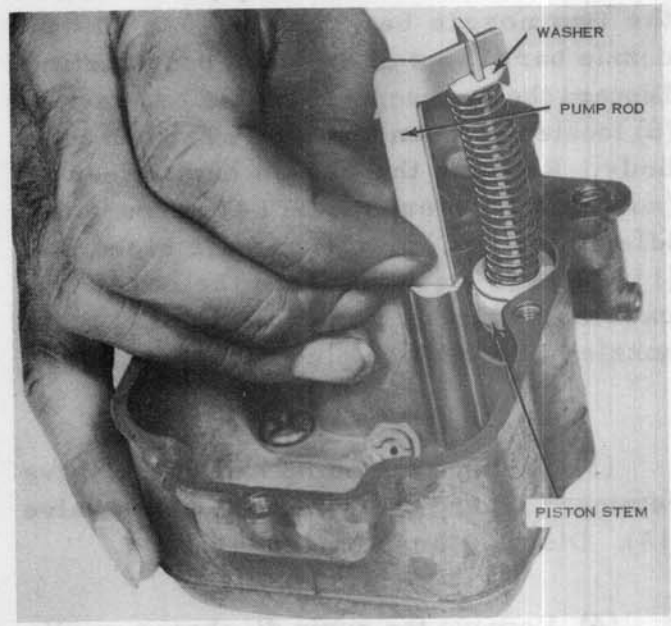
REMOVE ACCELERATING PUMP ASSEMBLY
